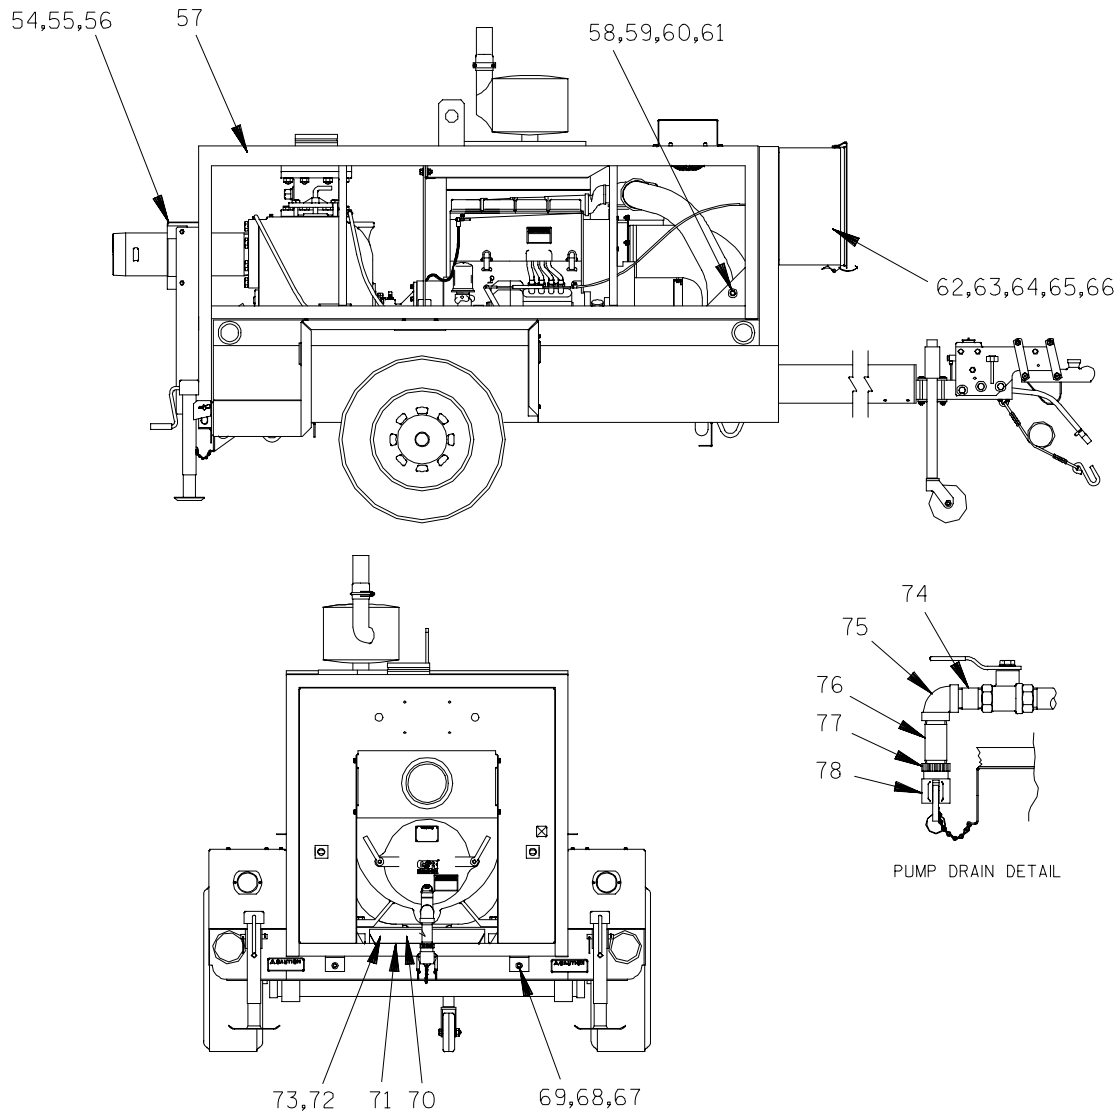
T6A3-F4L-SPA Pump Assembly (Cont'd)
